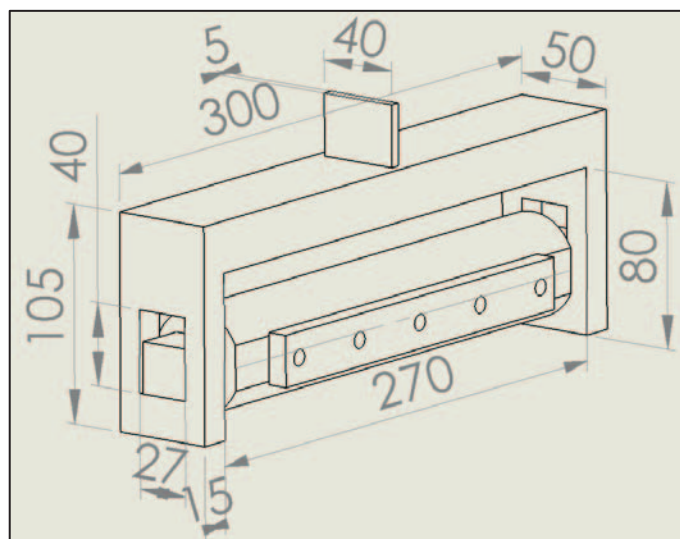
Technical drawing of complete geogrid tensile testing clamp with attachment using Solidworks (dimensions in mm)
